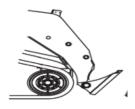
A - QUICK ATTACH COUPLER LOCKED TO ATTACHMENT
